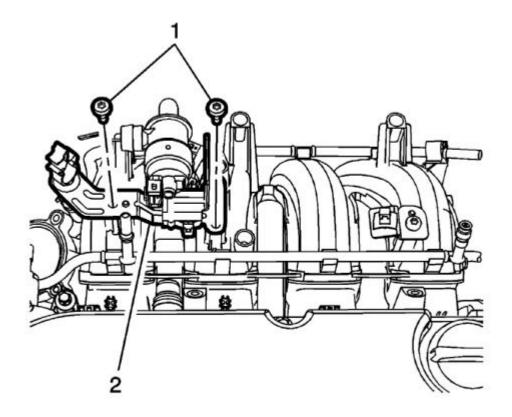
Evaporative Emission Canister Purge Solenoid Valve Bracket & Bolts Courtesy of GENERAL MOTORS COMPANY
